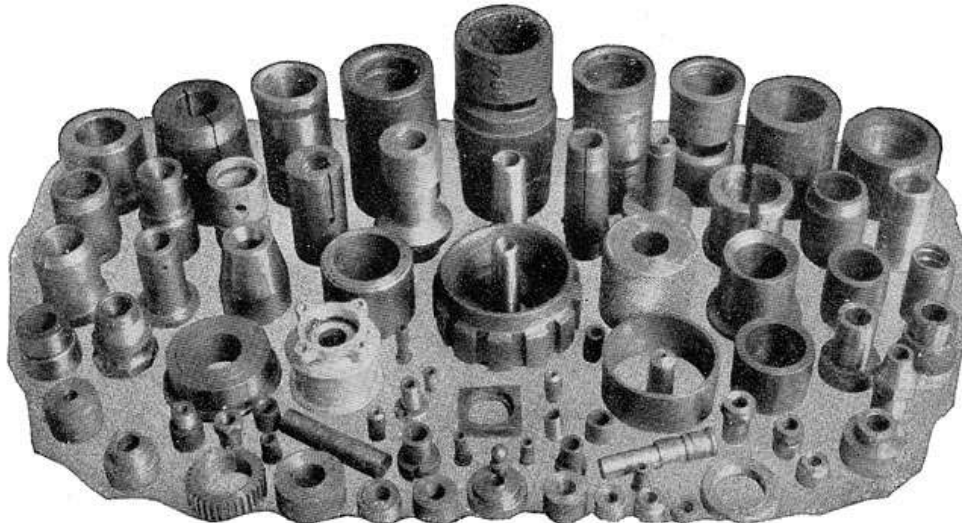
Various Types of Bushings That Can Be Made in the Lathe.
